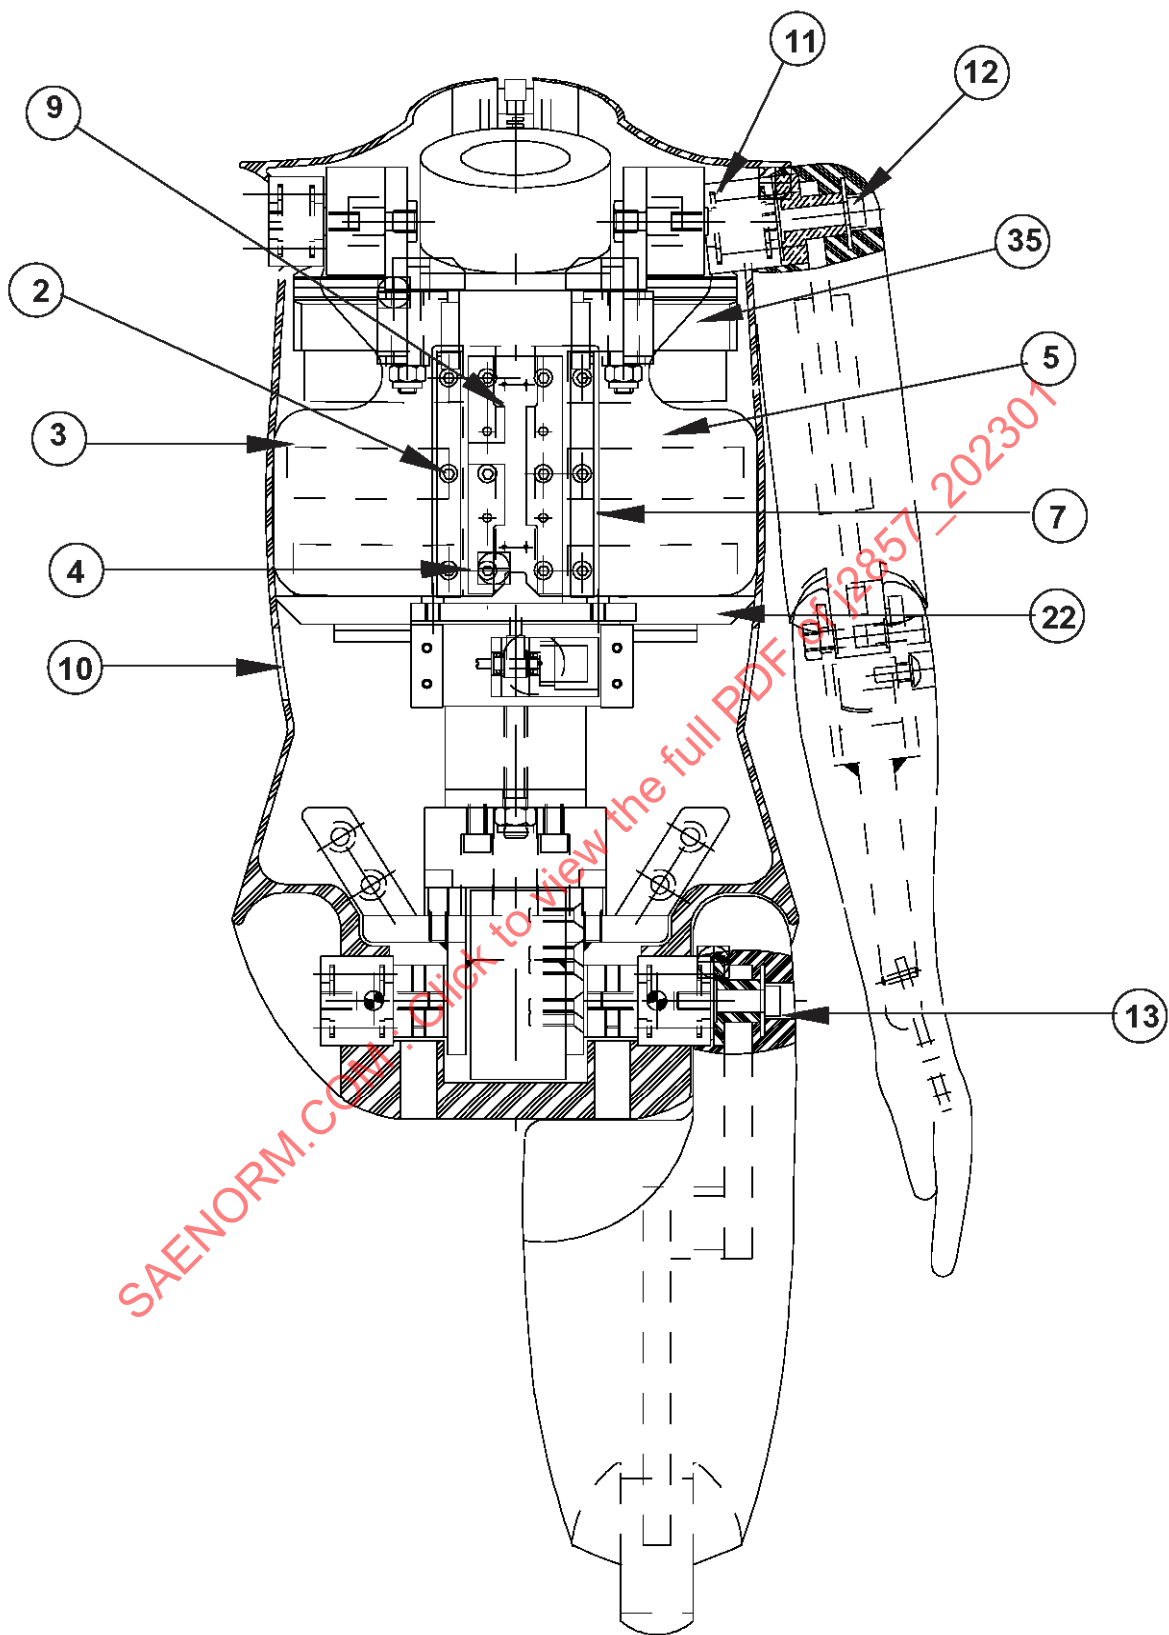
FRONT VIEW OF TORSO ASSEMBLY
